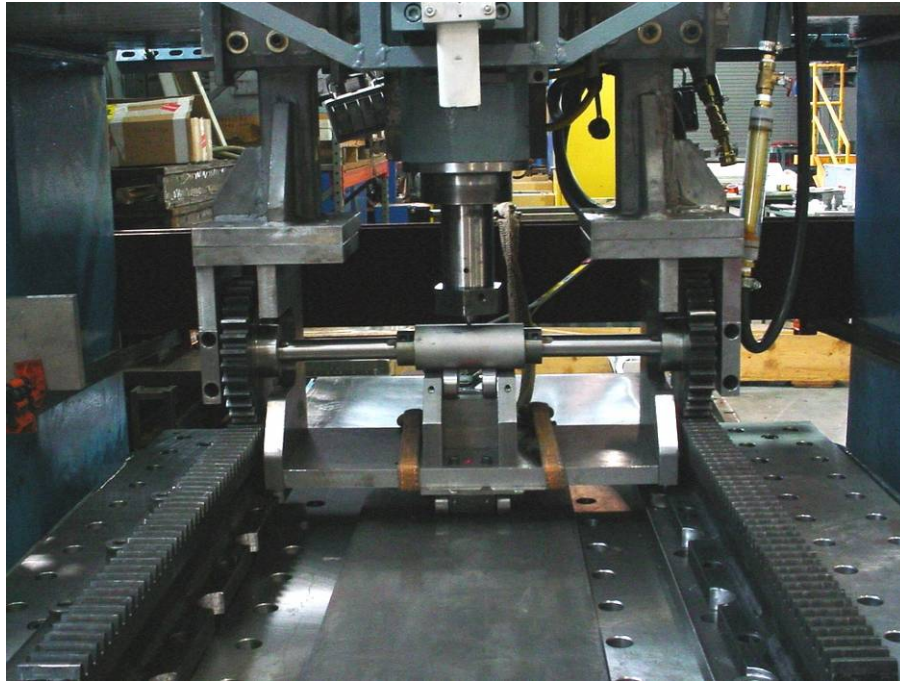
Tube Weld Fixture Setup for Welding MA 956 Tube
